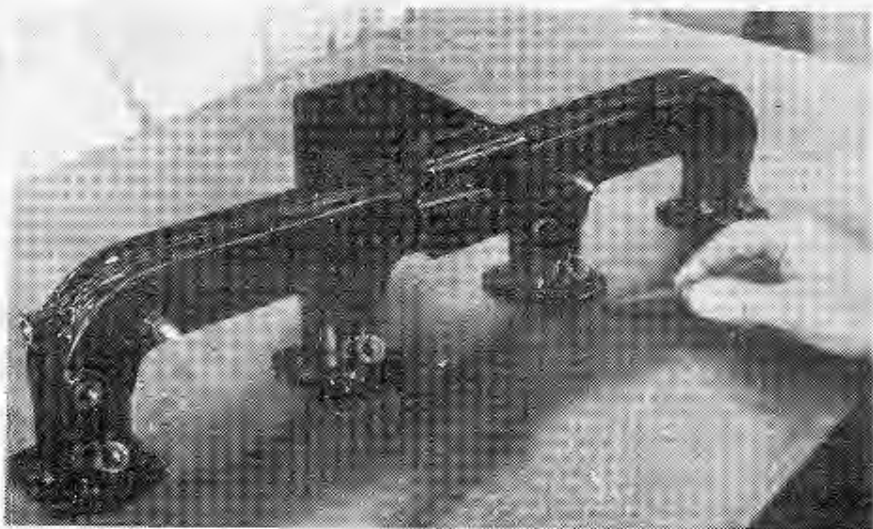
Checking induction manifold flanges for alignment on surface plate
